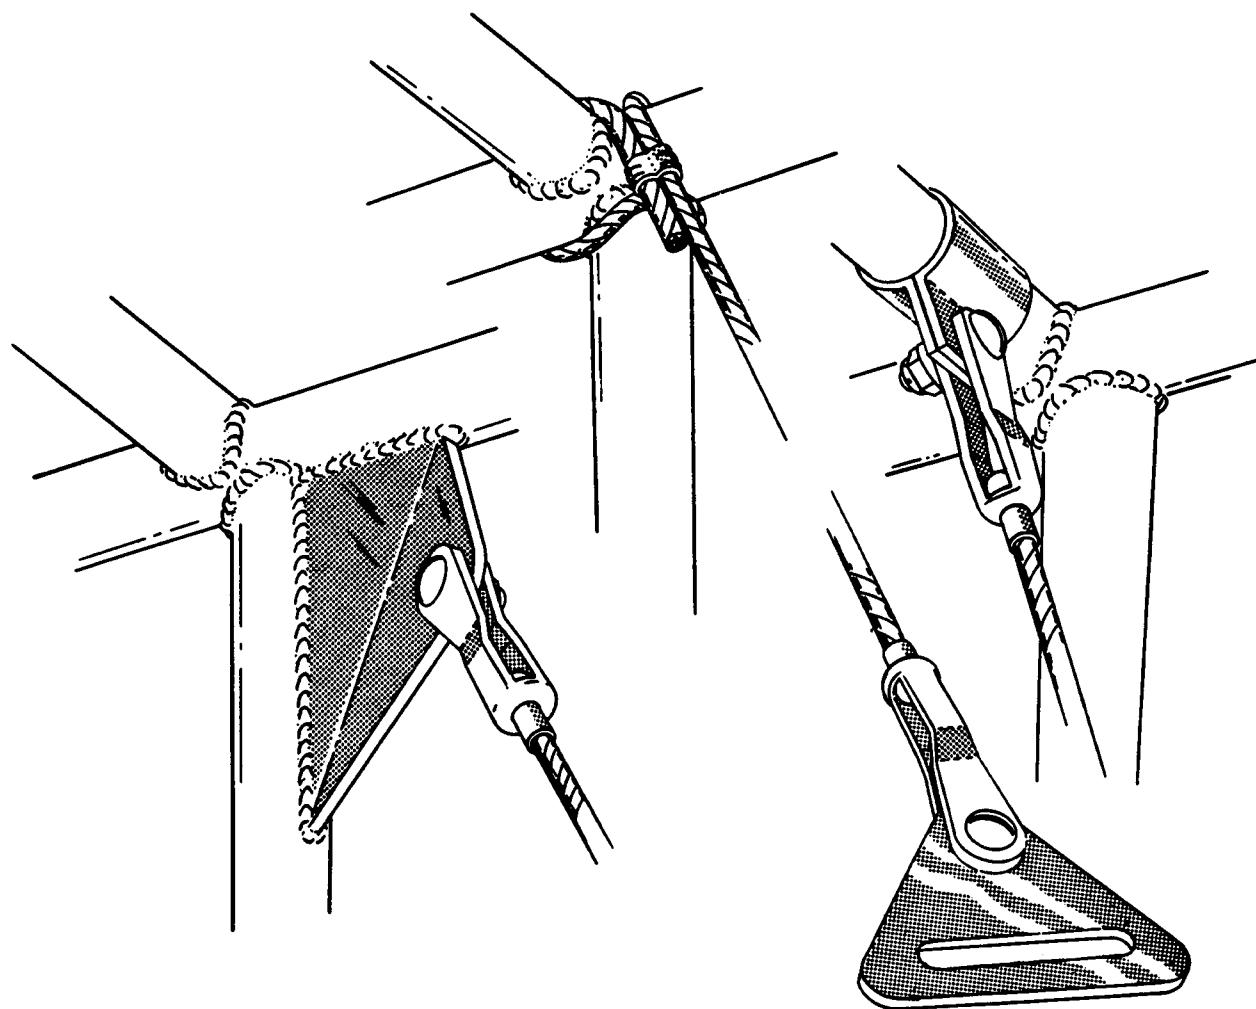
Typical attachment to tubular members (adequate chafing protection for tube should be provided. Detail omitted for clarity.)
